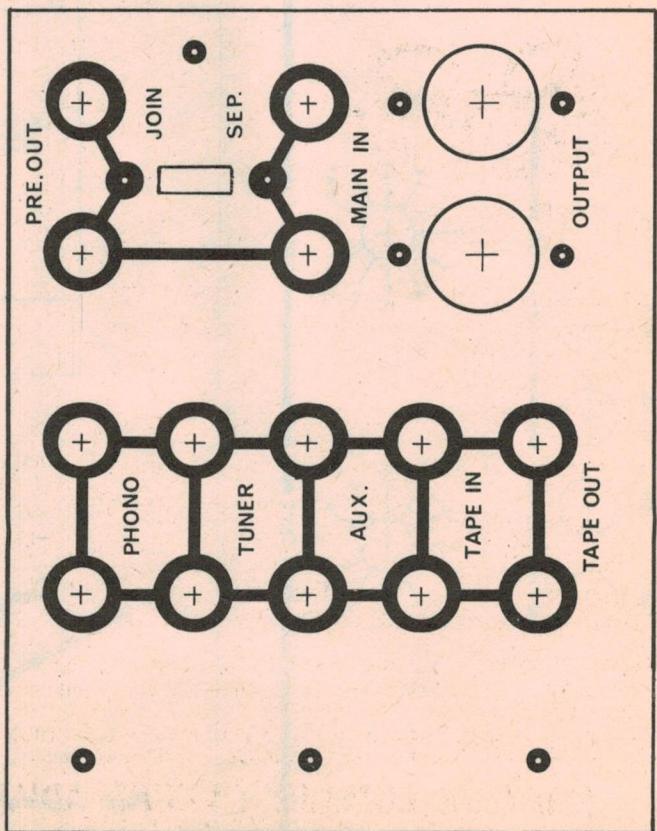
Details of the rear panel. Material 1.6mm fibreglass 1oz cu board.
